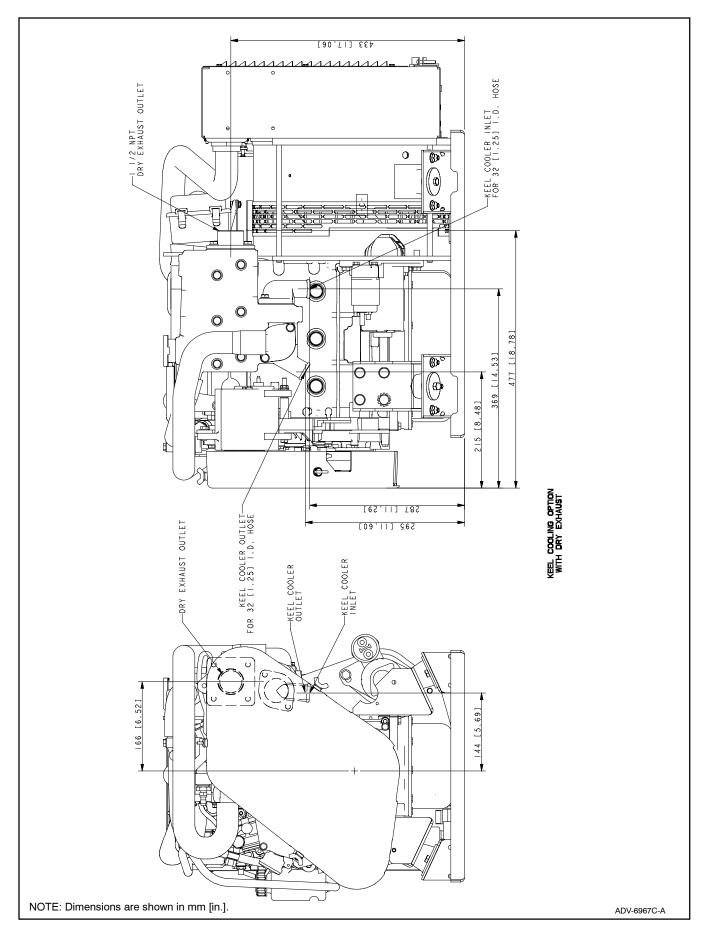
Dimension Drawing, 9EOZD and 7EFOZD with Keel Cooling
